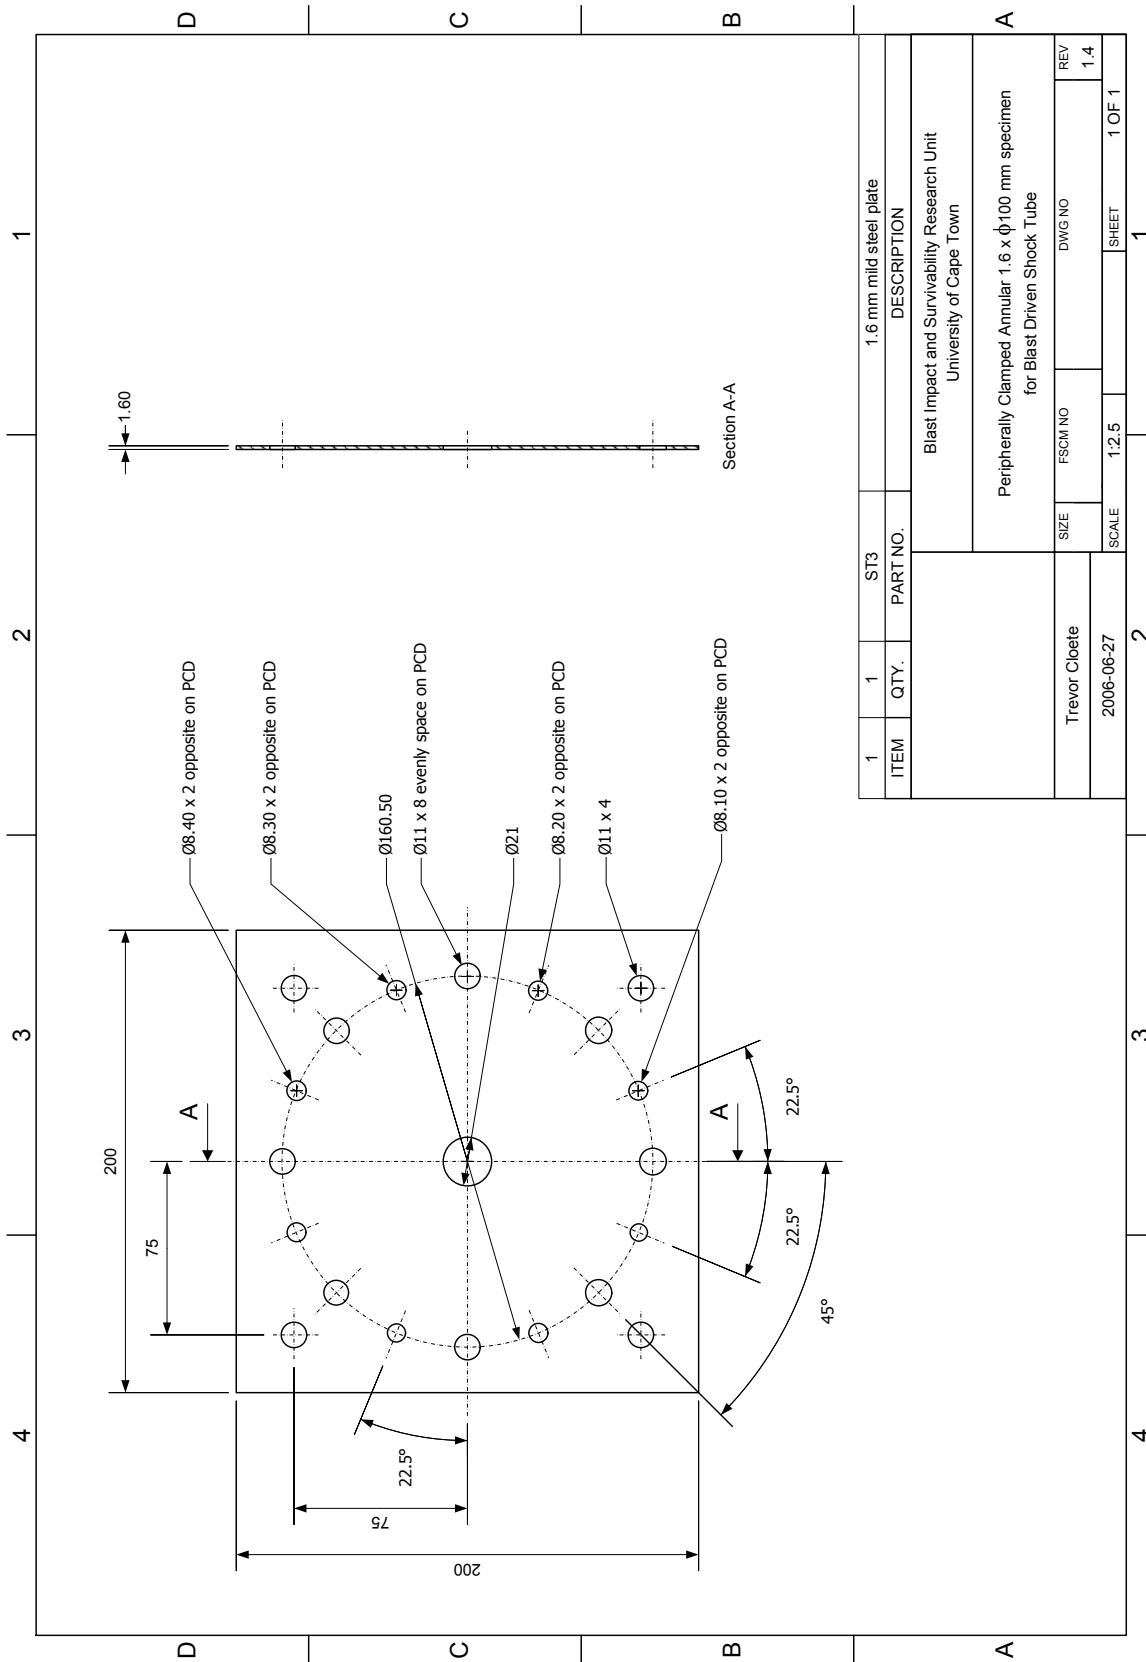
Peripherally clamped annular (PCA) plate specimen dimensions.
